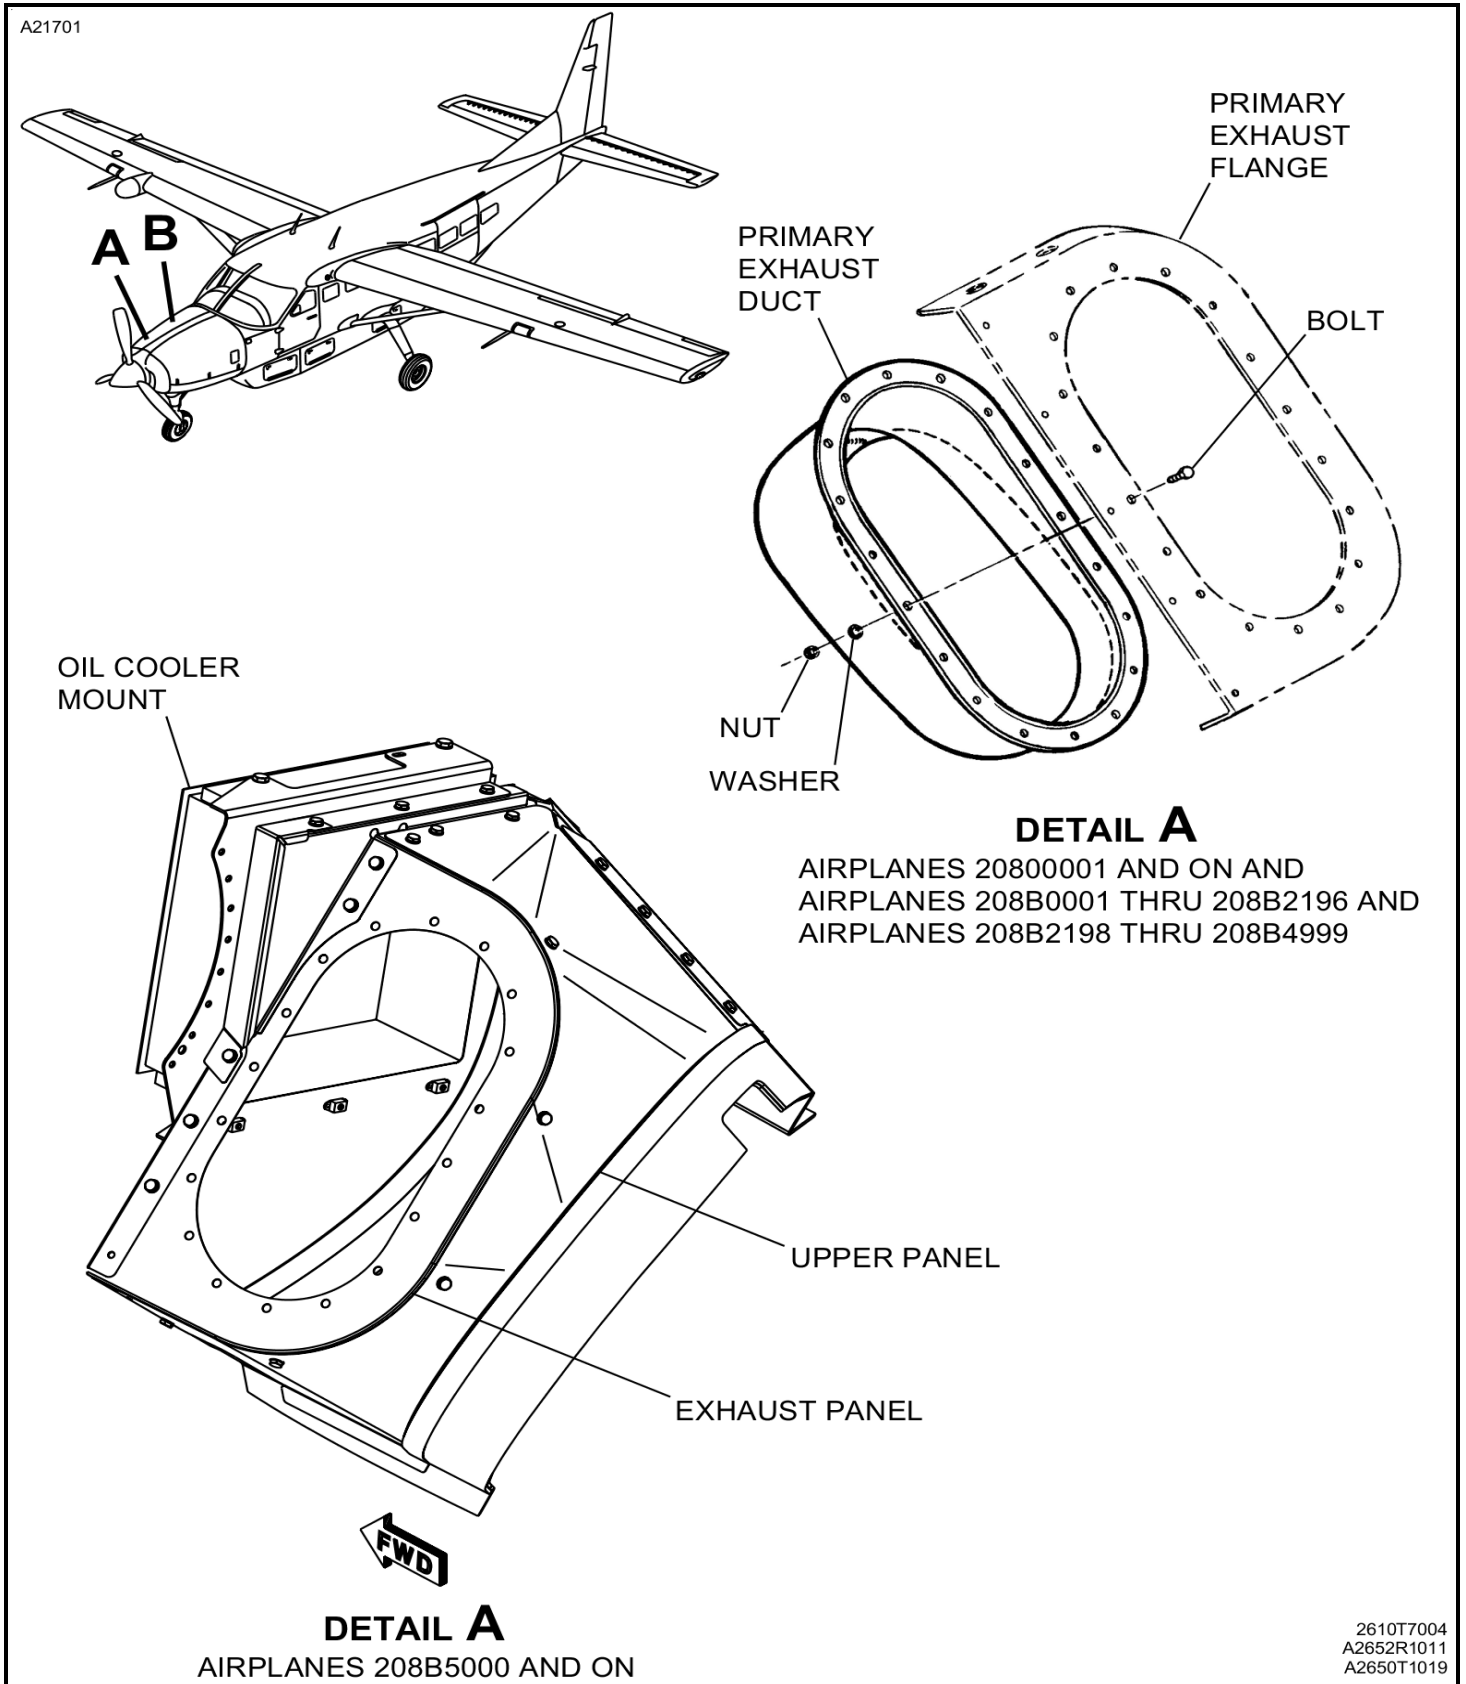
Sheet 2 : Engine Exhaust System Installation (Without Cargo Pod)
